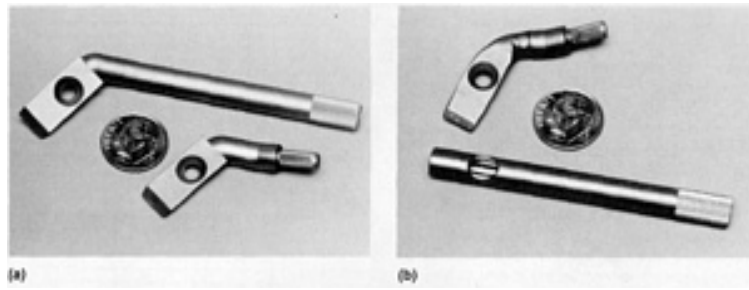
(a) Single-piece MIM part that replaced (b) a two-piece automobile turn signal lever assembly. The smaller MIM part in (a) was the first version, while the larger MIM part is the finished version that replaced the two-part assembly shown in (b). Courtesy Remington Arms Division of E.I. Du Pont de Nemours & Company, Inc.
